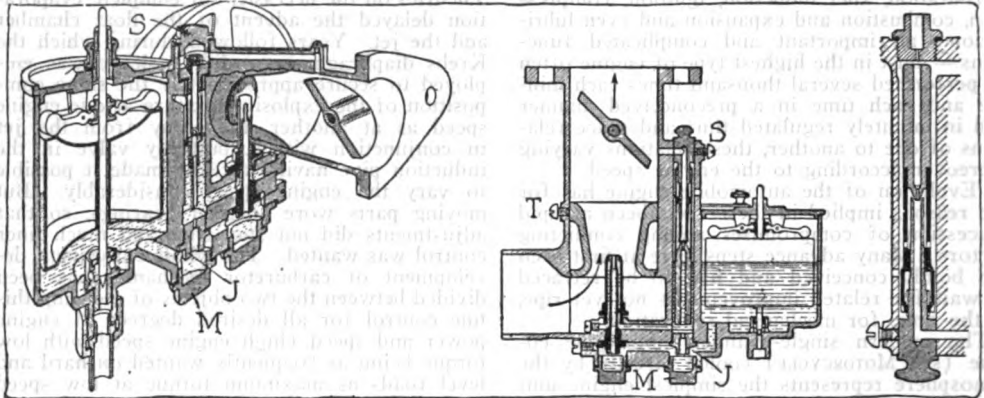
Sectional views of widely used carburetor of French design in two patterns; one with horizontal delivery pipe (to the left in illustration) and adapted to be mounted high on block-cast engine, avoiding exposure of pipe and condensation of fuel vapor; other with vertical delivery pipe, as used for engines providing heating by water or exhaust gas of the conduits. Larger scale view (to the right) of auxiliary jet for "idling" engine and fuel reserve for rapid acceleration. Main jet in choke-tube has central channel fed with fuel through duct J from float chamber, and annular channel fed through same duct that feeds auxiliary jet S. Latter connects with atmosphere at top and when engine is operated with throttle flap open fuel in auxiliary jet drops low and suction pulls air into annular channel of main jet, mixing with the fuel and keeping proportions in fuel mixture correct. When throttle is closed, suction from cylinder acts close to aperture of auxiliary jet and draws a relatively rich mixture, as required for "idling."
